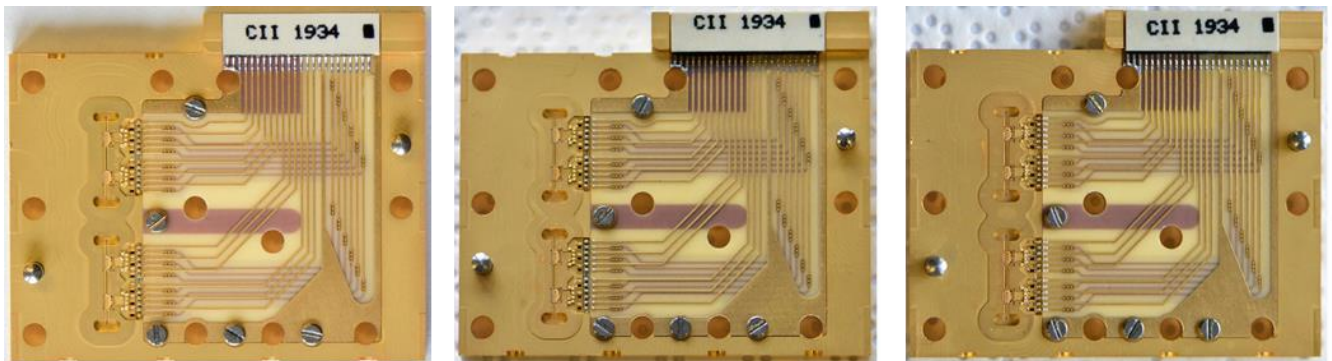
Assembled LNA-parts of the three single-pixel modules produced. Left to right: SN#1,2 & 3.
